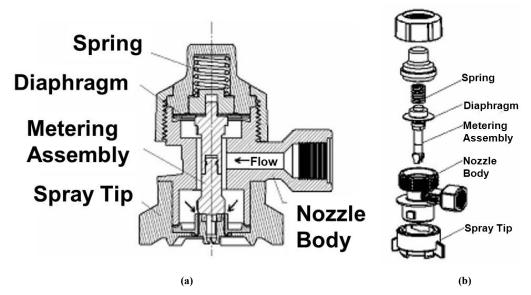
Cross-section (a) and component views (b) of the VeriRate nozzle showing nozzle design and assembly.
